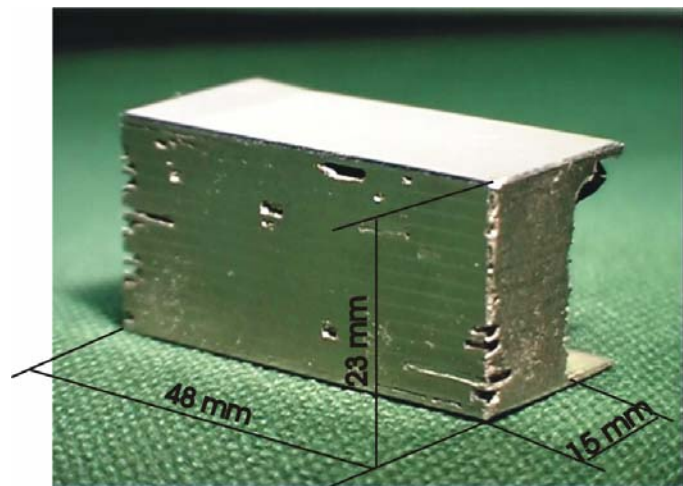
Test piece with heater after brazing – the outer box was partially removed.
